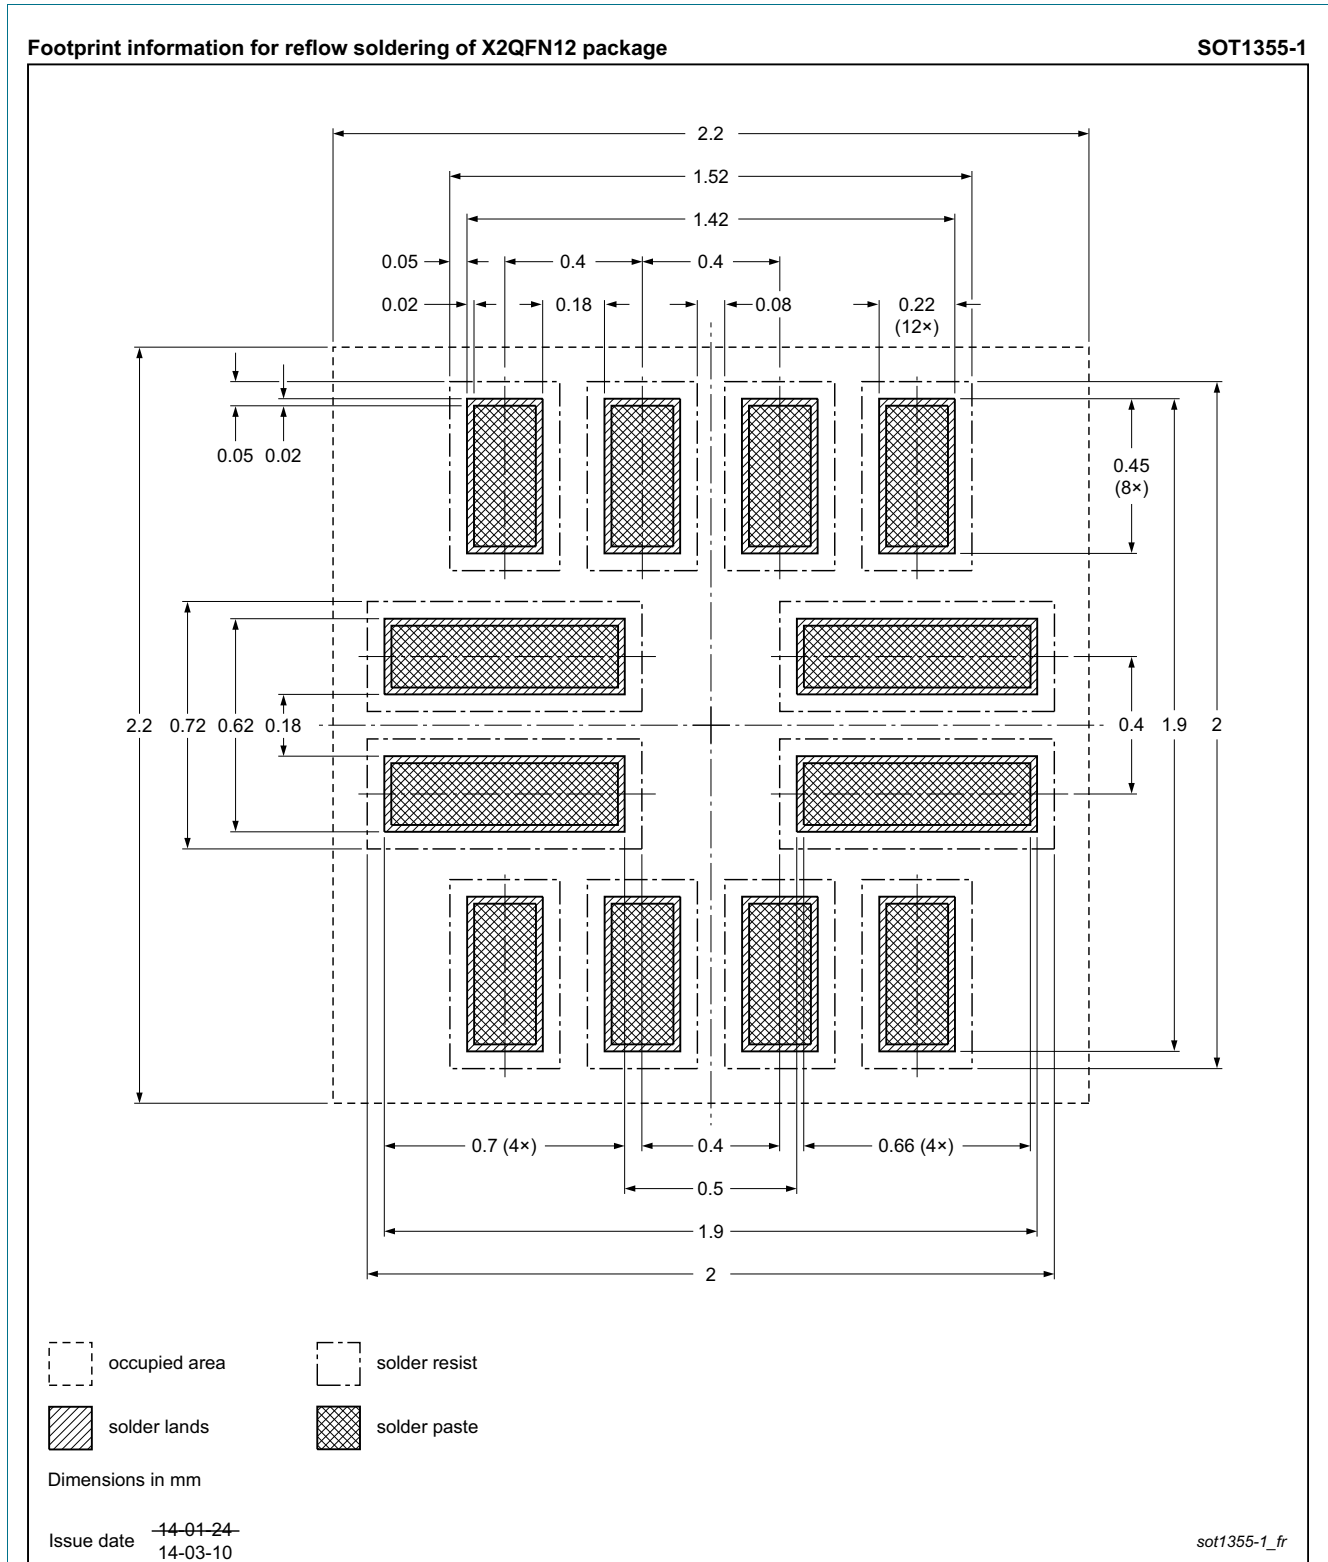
PCB footprint for SOT1355-1 (X2QFN12); reflow soldering
